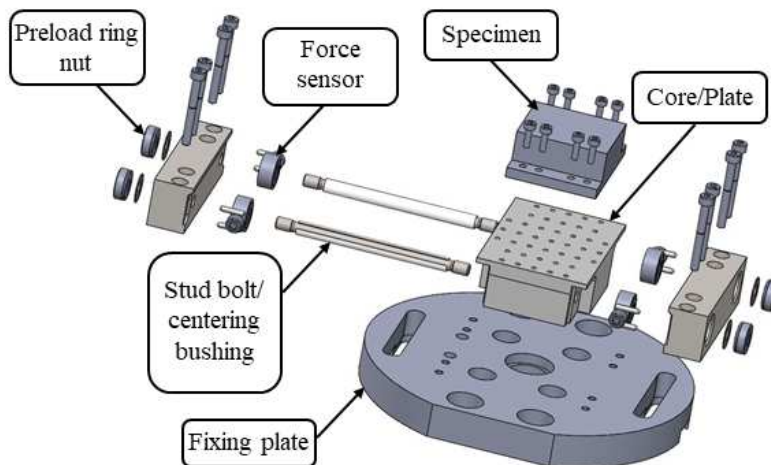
High performance mini dynamometer exploded view (LAMA FVG<sup>TM</sup>)
